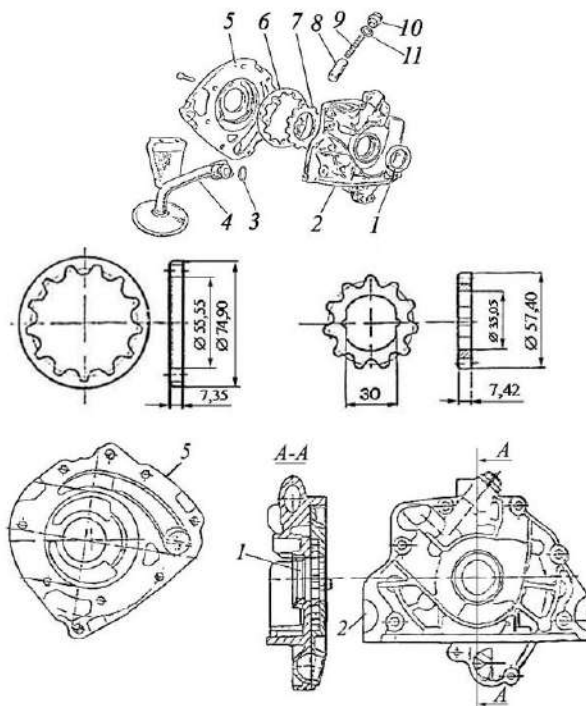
Design of an oil pump with internal gearing: 1– ring;
